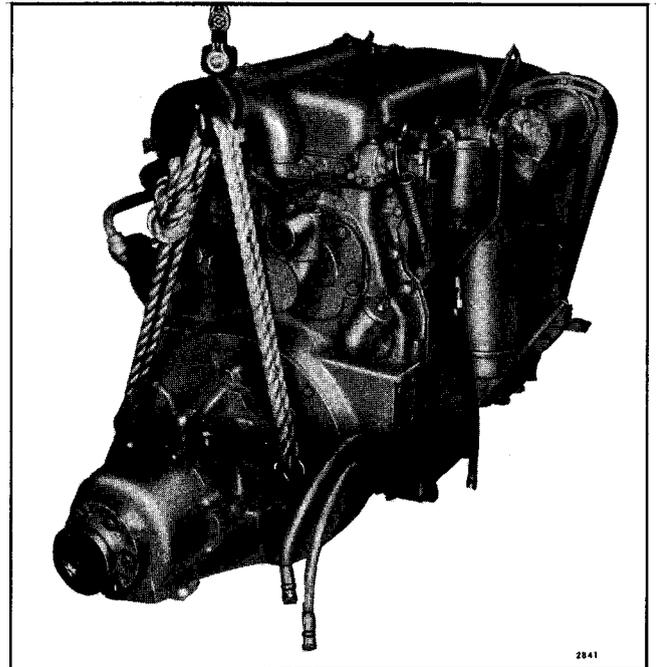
Removing Reverse and Reduction Gear Assembly from Engine
